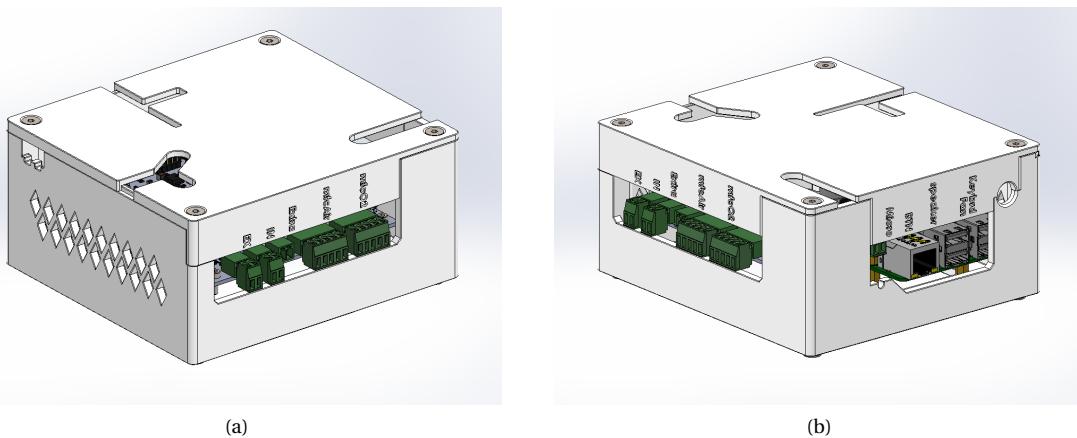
Two views of the Electronics Housing, including the PCB and roof.
